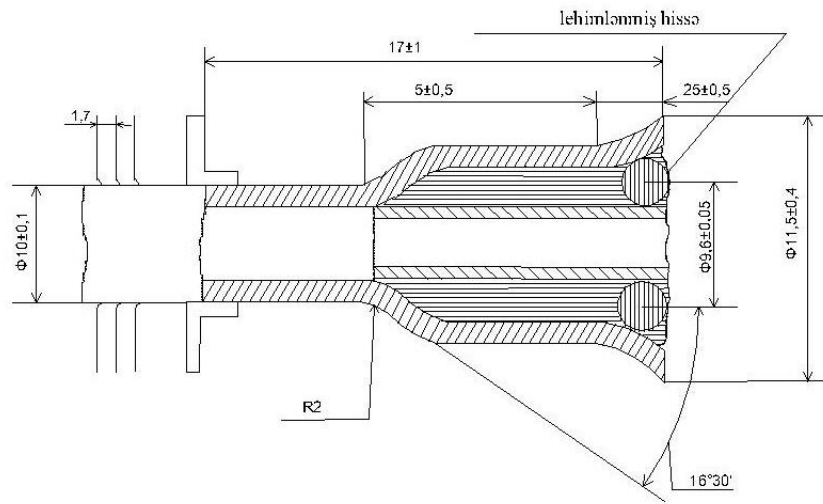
Structural drawing of the steel joint to be soldered and scheme of solder placement.
